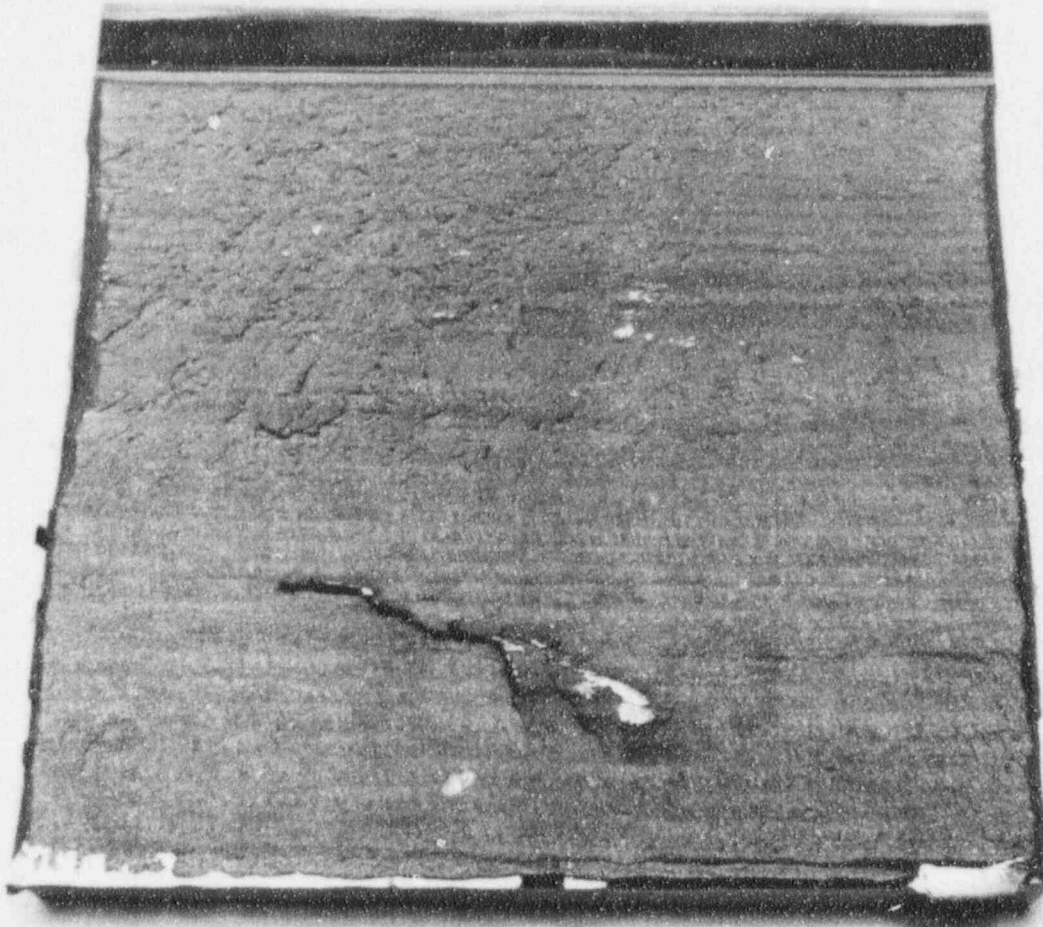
Fracture surface of full-thickness clad beam specimen CB-3
